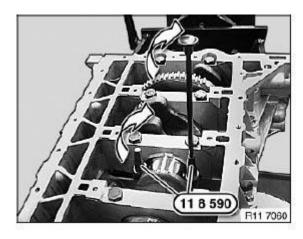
Identifying Special Tool (11 8 560) On Crank Pin Courtesy of BMW OF NORTH AMERICA, INC.
